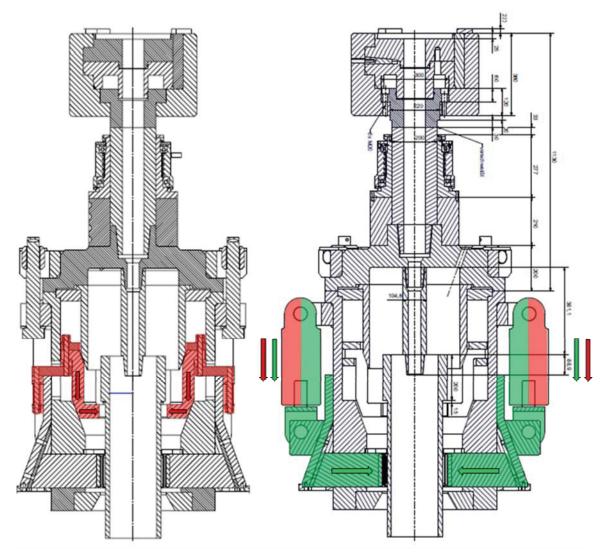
Elevator wedges (red) and Clamping jaws (green) opening/closing mechanism
